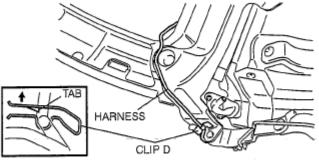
Identifying Harness, Groove And Roof Link Lock Courtesy of MAZDA MOTORS CORP.
